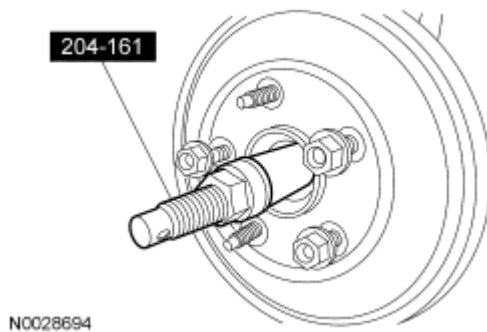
Installing Outer Halfshaft End Into Hub Assembly
